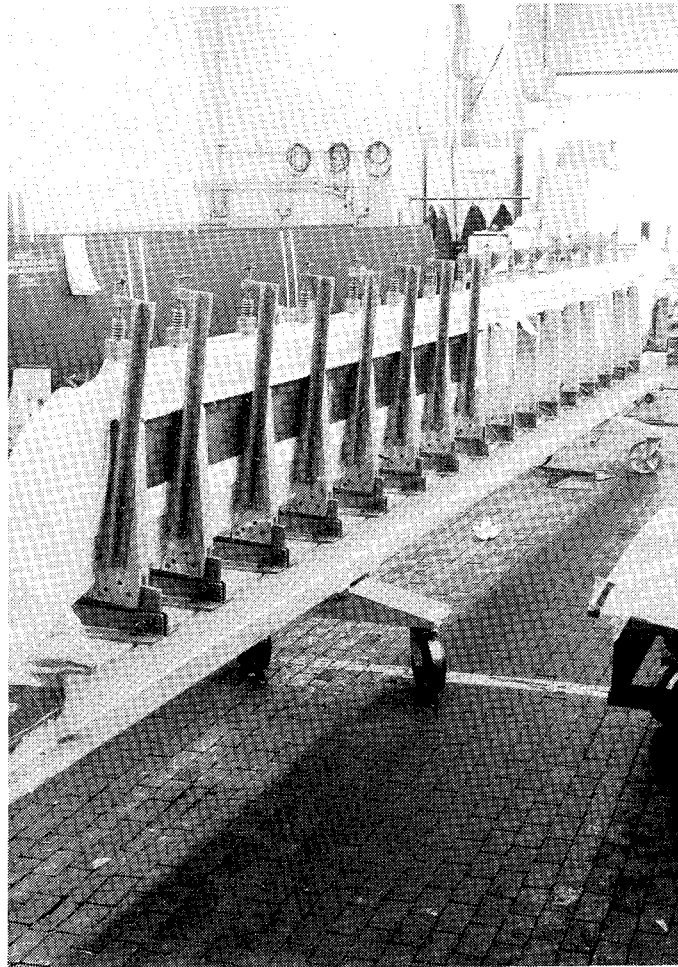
Holding fixture for layup and cure of leading edge splice cap.
